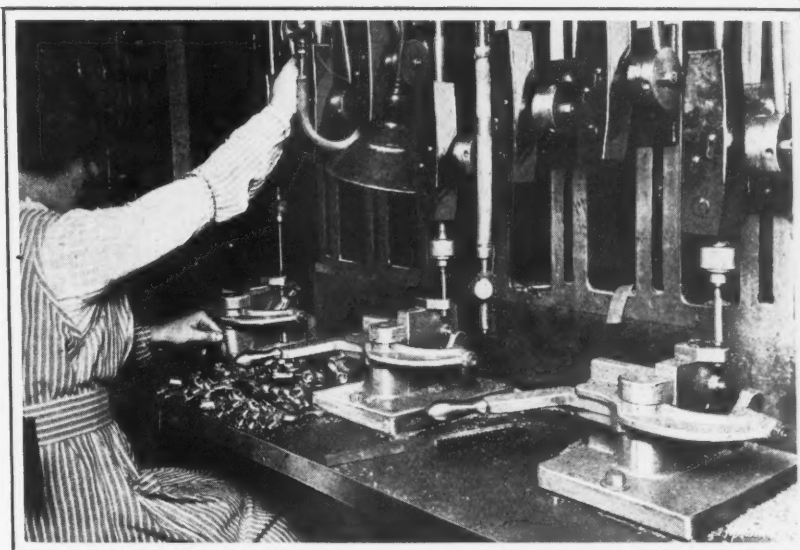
Universal Drilling Fixtures used on Seven-spindle Drilling Machines
